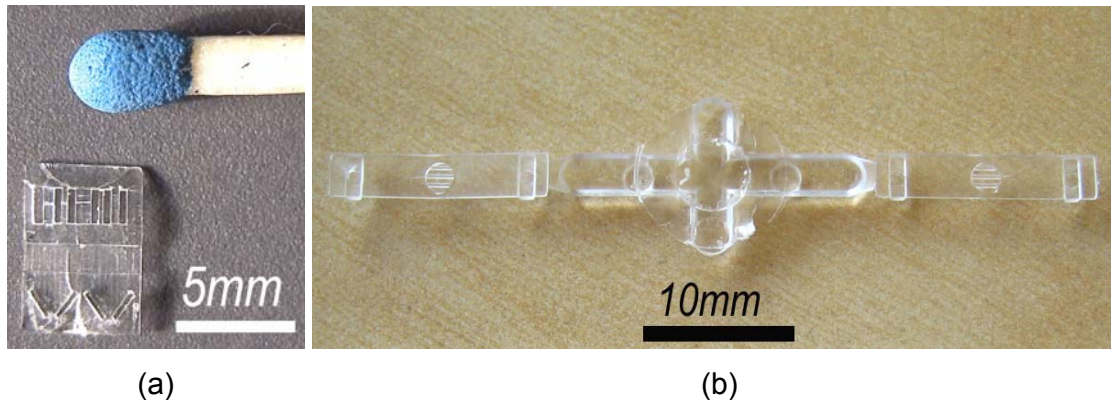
Thin plate employed for the weld lines investigation (a) (see section 3.1.3) and micro injection moulded tensile bar test part (b) (see section 3.2.2).
